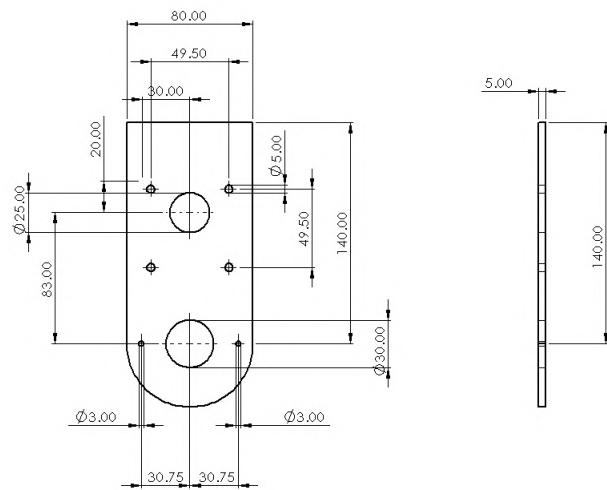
2D Drawing of the motor mount (All dimensions are in mm)
